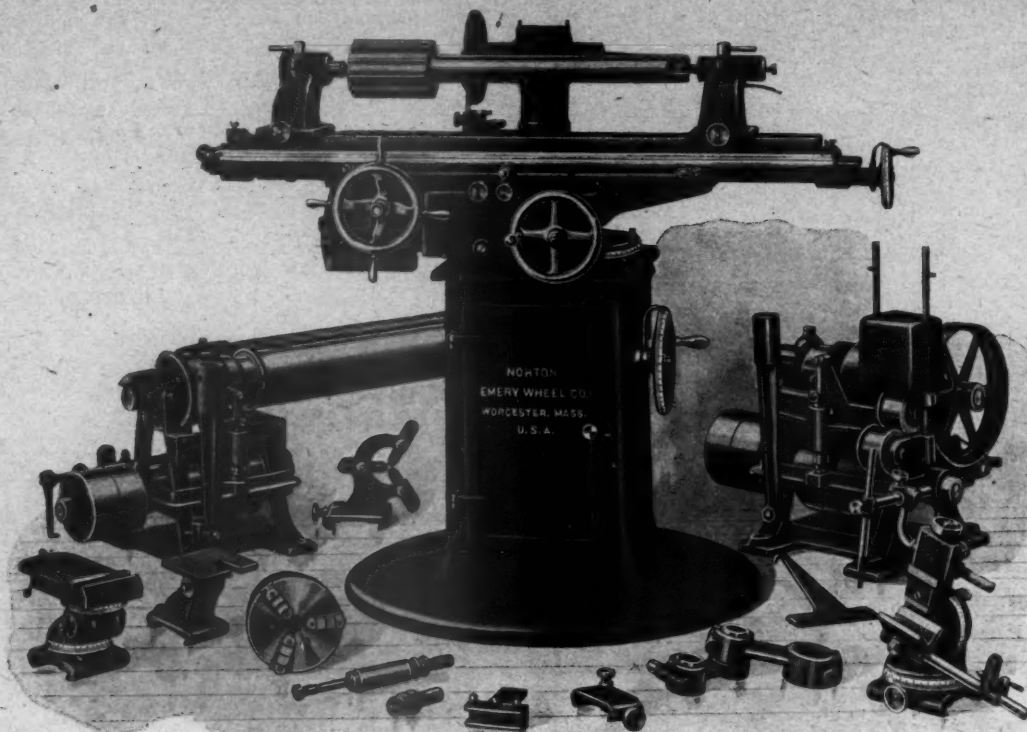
NO. 2 UNIVERSAL TOOL AND CUTTER GRINDER.
